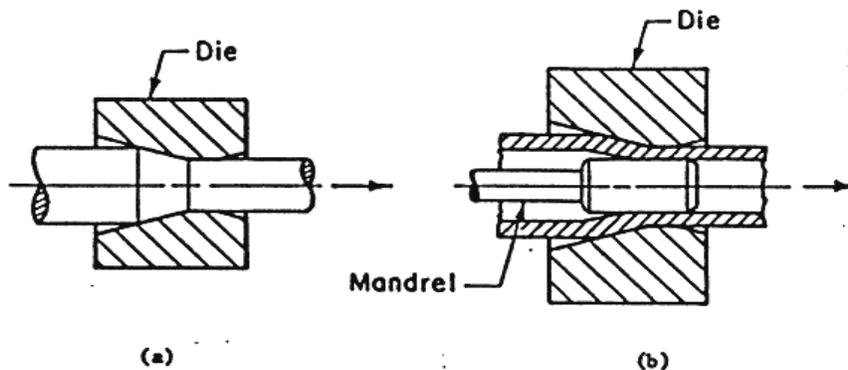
Drawing process of (a) rod or wire & (b) tube or hollow, Source [3]
